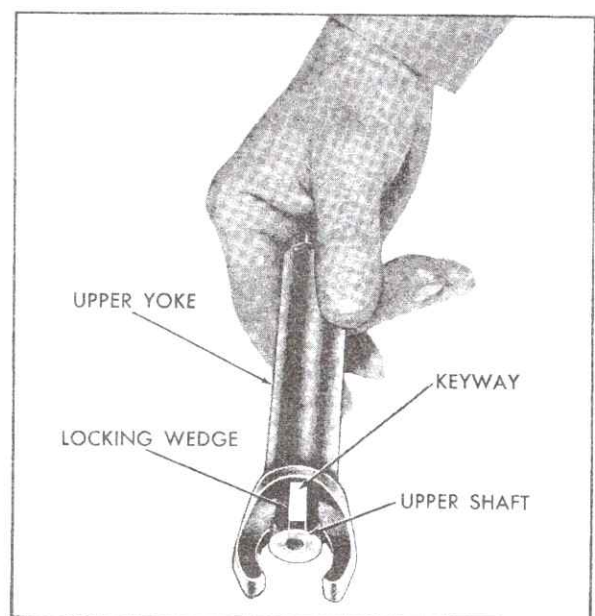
Installing Locking Wedge and Upper Shaft Into Upper Yoke
